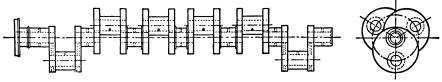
6-Cylinder, 7-Bearing Disk Crankshaft, High-Speed Type.
